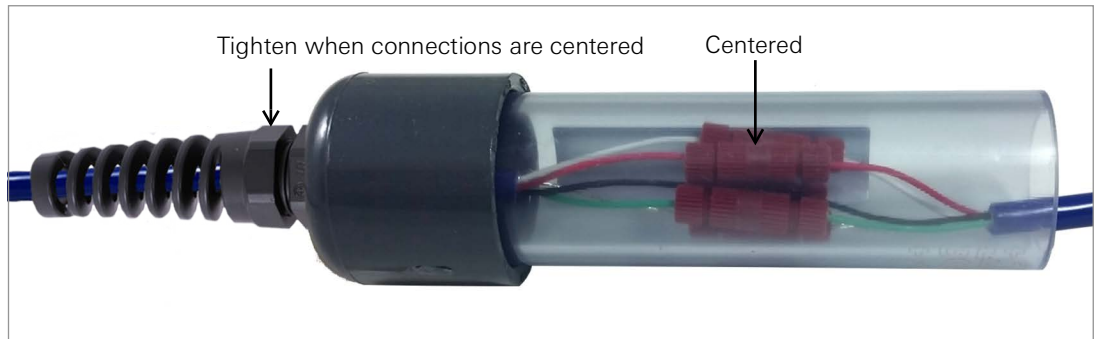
Posi-Lock Connectors Centered Inside the Tube, Tighten Fitting
